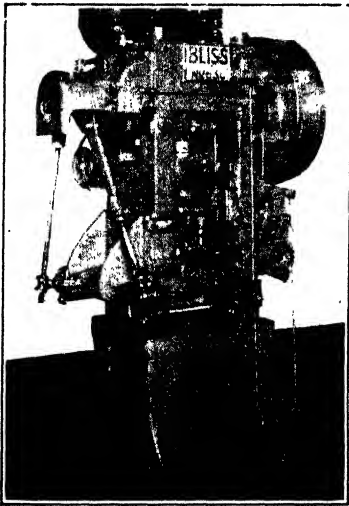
A "high-production" press with single roll feed and a push-over motion for a secondary bending operation.
